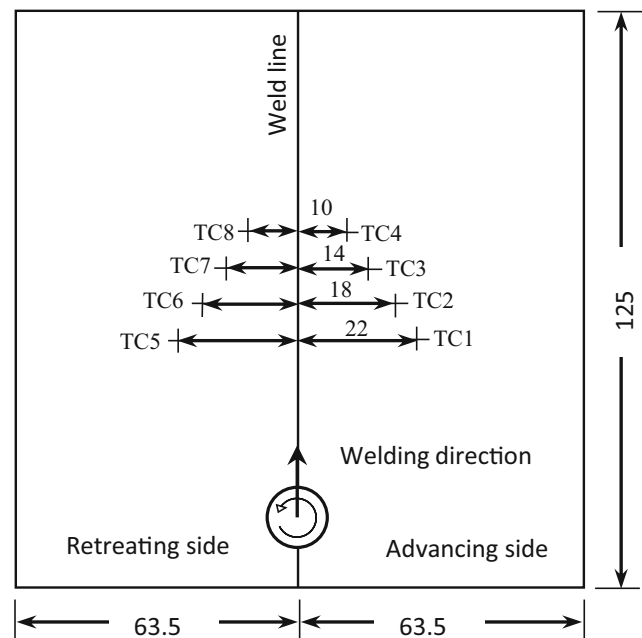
Welding geometry showing locations of thermocouples along both sides of the weld line. Vertical distance between thermocouples is 4.0 mm
